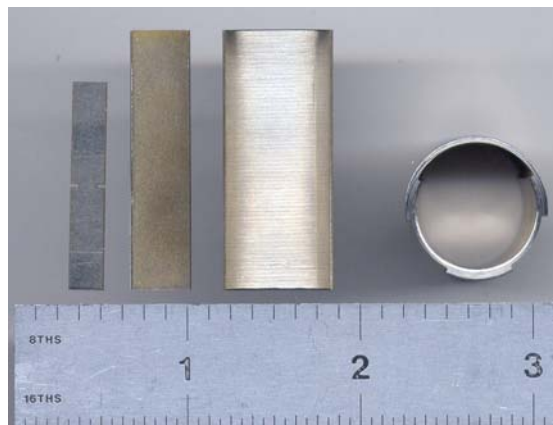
Photograph showing surrogate hardware (1/2" SCH 5 pipe), material sections from the ID and OD, and double edge notch fracture-mechanics specimen.
